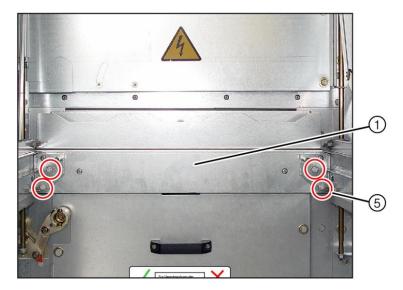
4 bolted joints on protection plate of switching-device compartment
